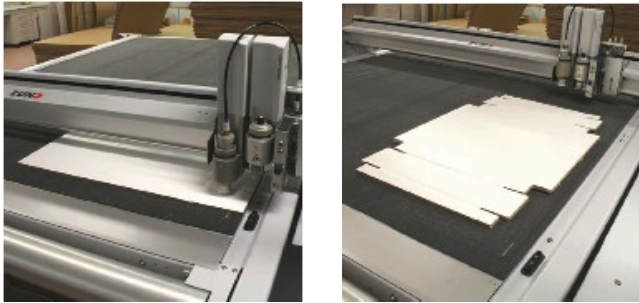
Manufacturing of active packaging using common technology for the fabrication of standard packaging.
